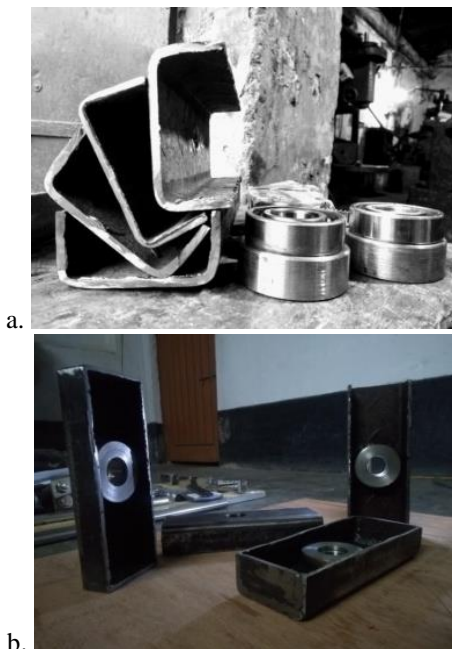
Uprights after manufacture, (a) rear, (b) front.
